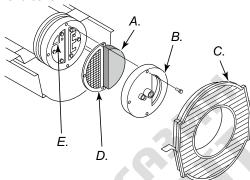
Air output, air intake and lint filters, 35.000, 64.000 and 70.000 Btu/Hr.
